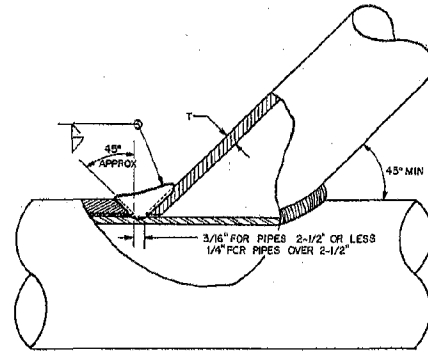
Fillet Reinforced External Root Connection, Single Bevel, Welded Both Sides
